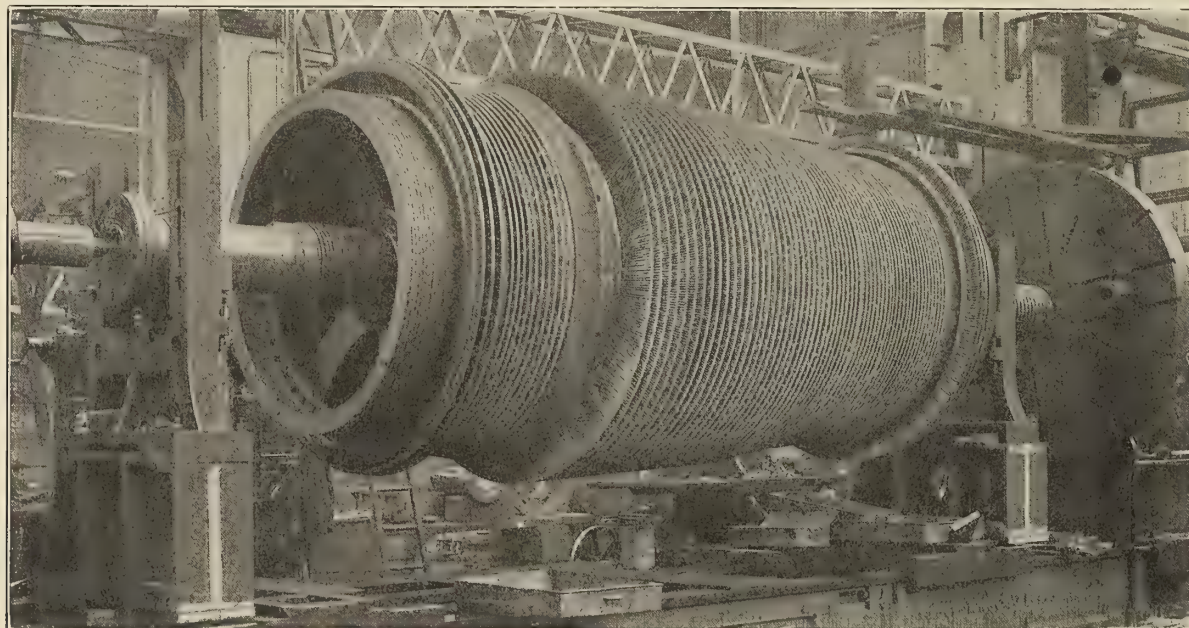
Turbine Rotor in Lathe, Showing Blading
